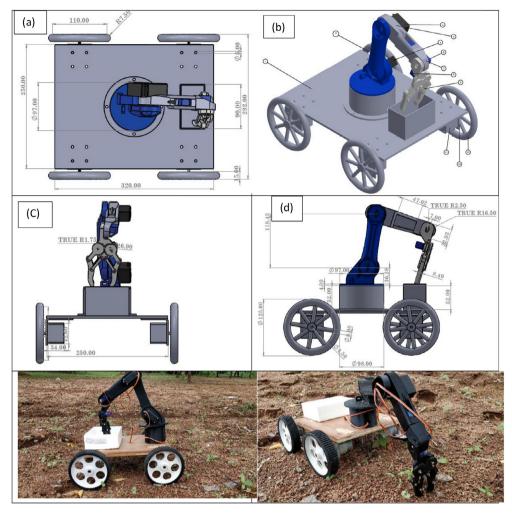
(a)-(e) Three dimensional CAD model of the different components of Smart seed sowing robot and actual 3D printed robot (a) Top view of the smart robot (b) Isometric view of the smart robot, (c) Front view of the smart robot, (d) Side view of the smart robot, (e) and (f) Testing of the fabricated robot in the field.
